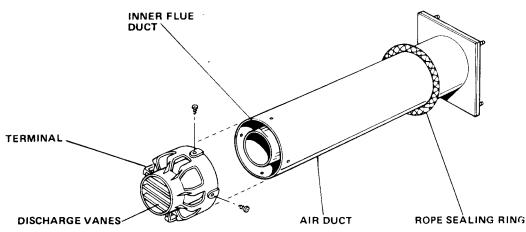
AIR/FLUE DUCT ASSEMBLY
